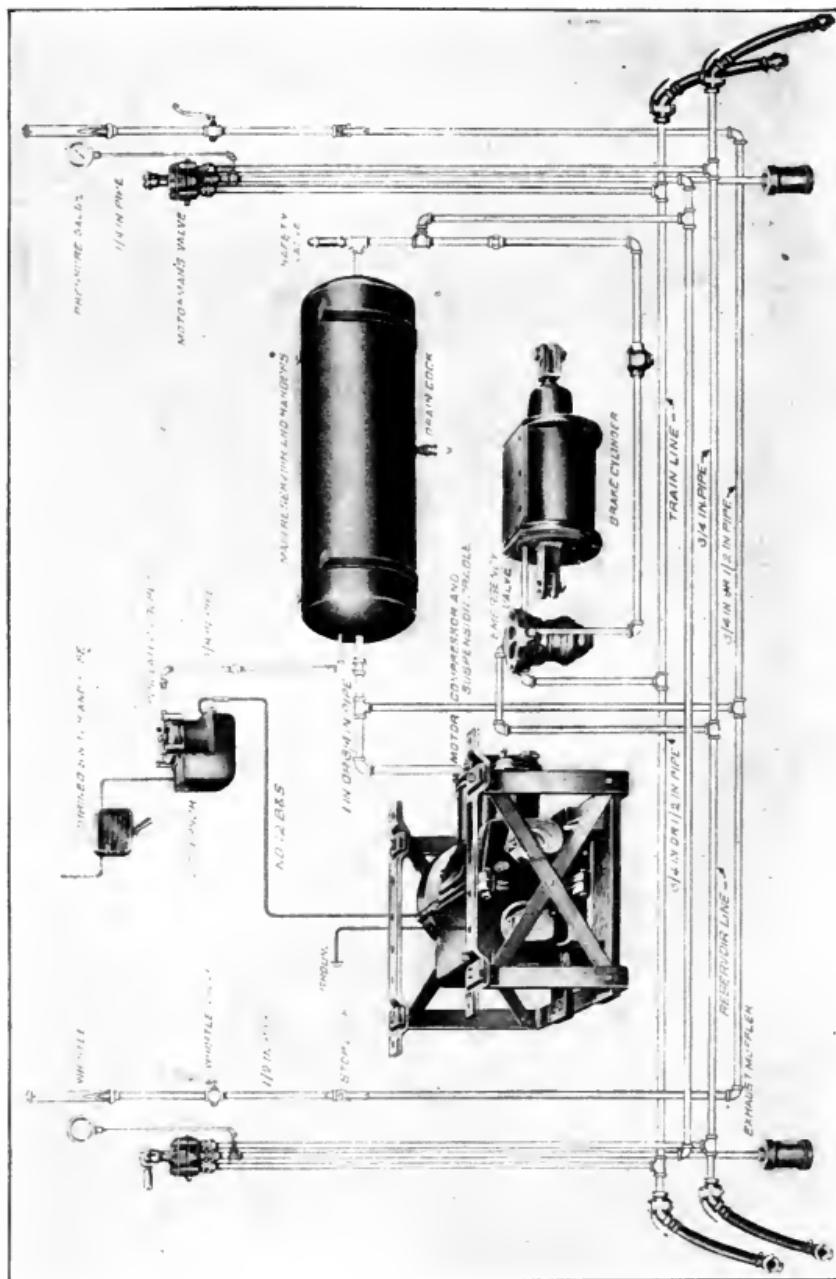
Emergency Straight Air-Brake System for Motor Car.
